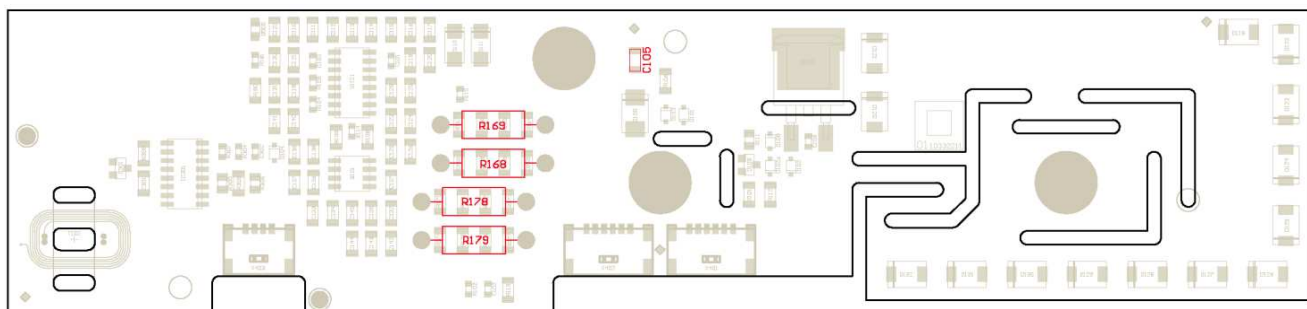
Assembly drawing of 1SP0335D2Sx with highlighted gate resistors
